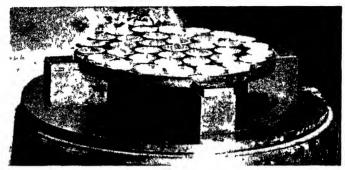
Grinding optical flats held on a mastic-covered plate
